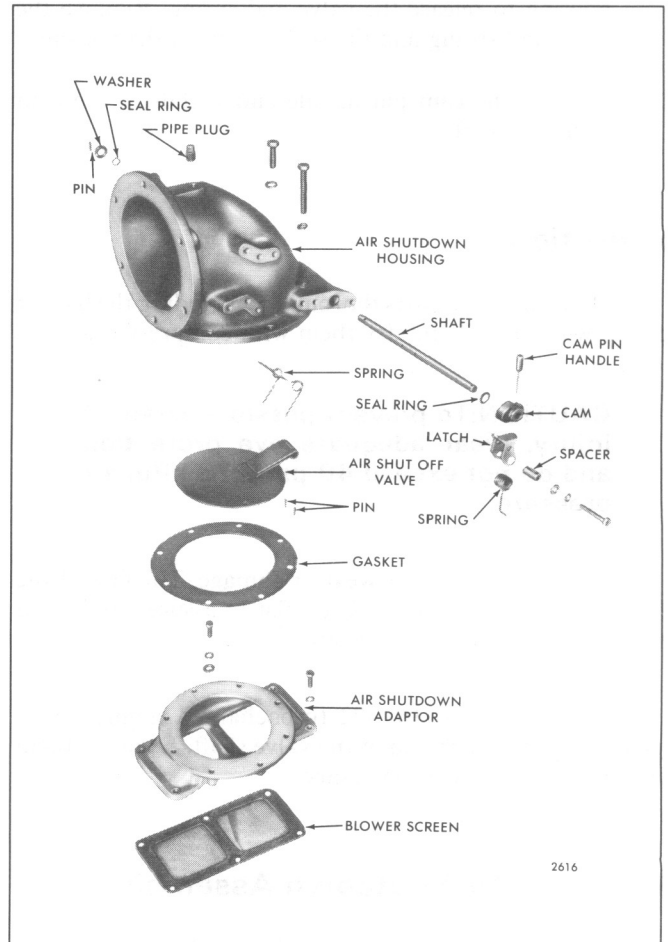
Air Shutdown Housing Details and Relative Location of Parts (Non-turbocharged Engines)
